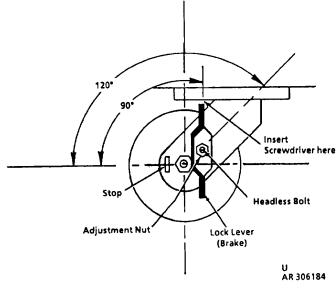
Caster Lock Lever (Brake) Adjustment
